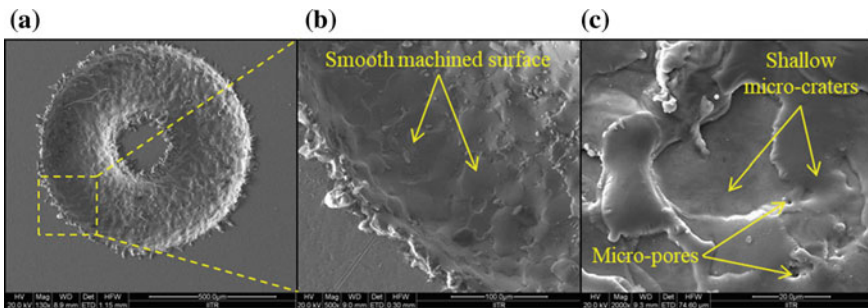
Morphology of machined surface at lower voltage using EDM oil as dielectric medium
